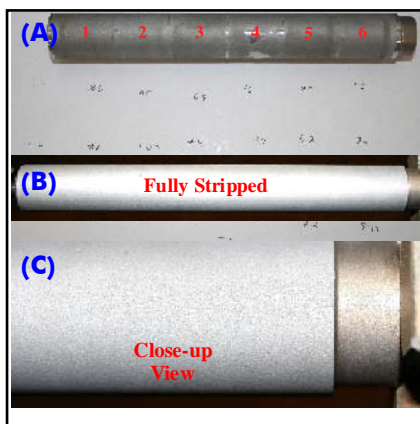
Removing thermal spray barrier coating from the inside surface of a combustion chamber.
